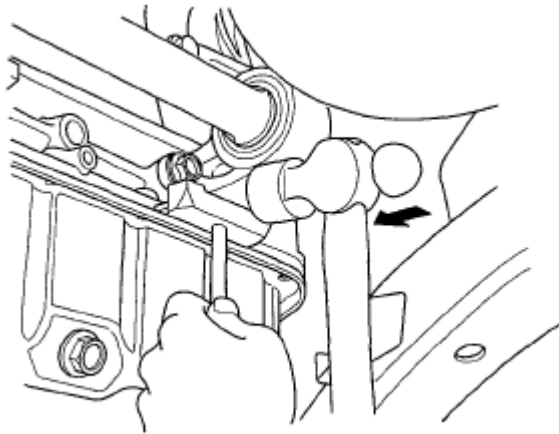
Driving Oil Pan Seal Cutter Between Oil Pan And Engine Block
